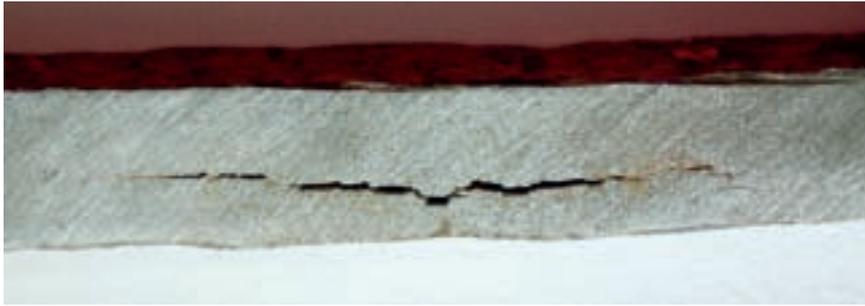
Stepwise cracking due to hydrogen diffusion inside an ASTM A 516 Gr. 70 steel plate.
